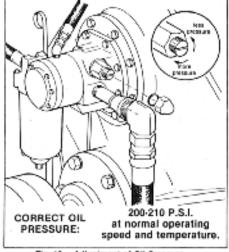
Adjustment of Oil Pressure. CAUTION: Relief Screw is Under Tension.
